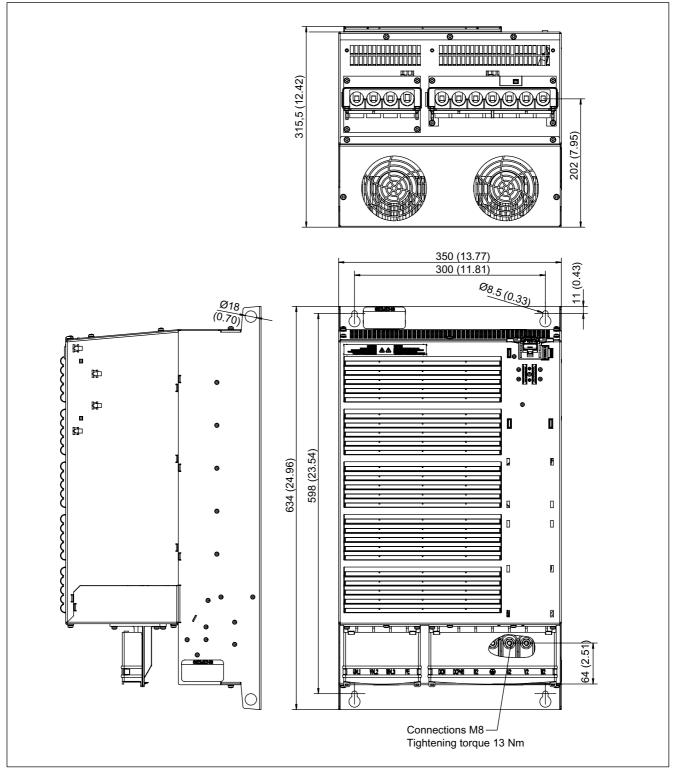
Dimension drawing: Power Module PM340, frame size FSF
